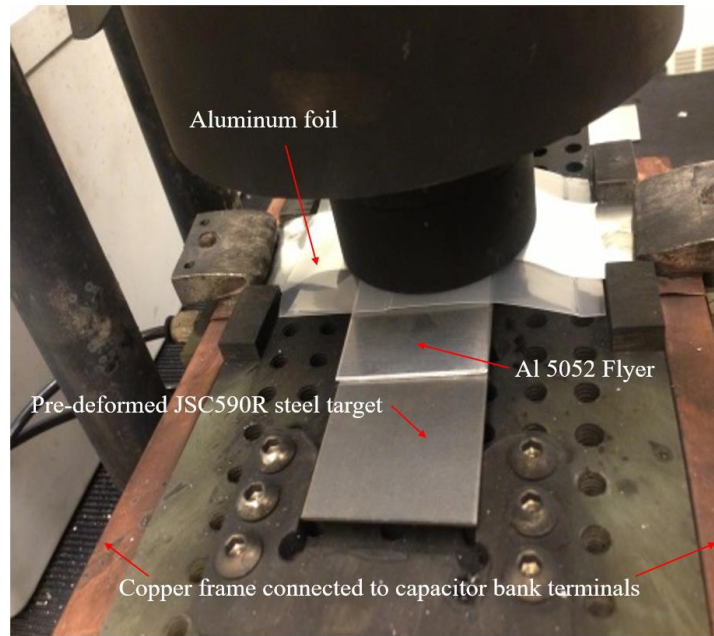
The actual implementation of VFA spot welding apparatus
